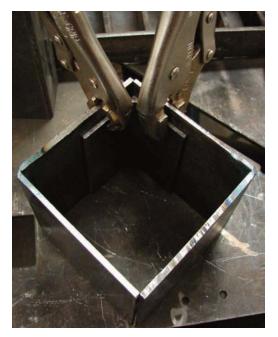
Use locking pliers to hold the sides together while tacking.
